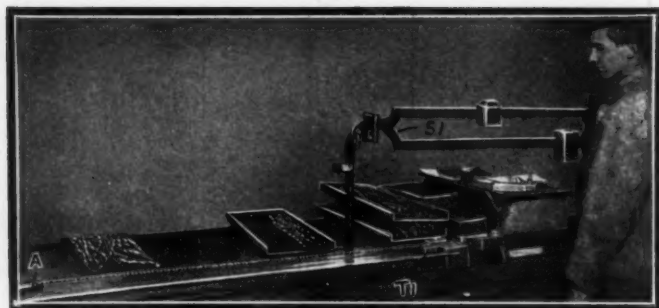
Testing completed chains in the plant of the Diamond Chain and Manufacturing Company
